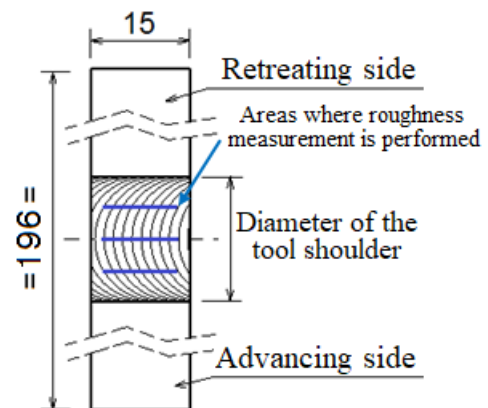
Areas of specimens in which the roughness of the weld bead is measured
